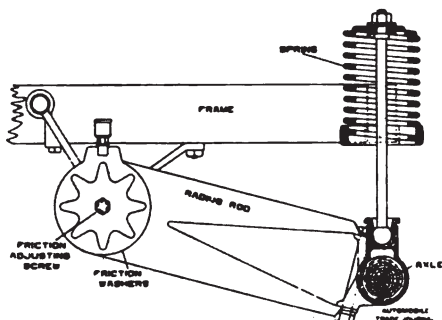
Detail view of the peculiar Brush Runabout helical spring and shock absorbing radius rod. This view also shows a section of one of the solid wooden axles.
